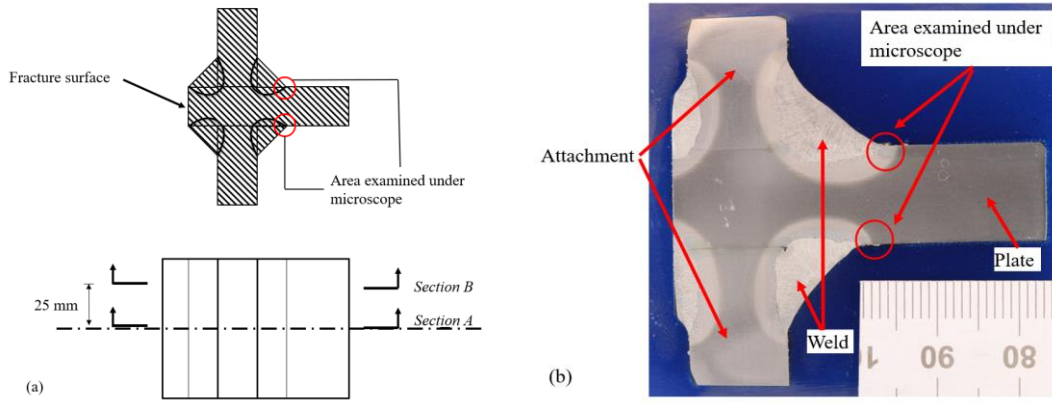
Macro-sectioning of run-out welds: (a) sectioning positions; (b) example of a macro-sections of the welds of specimen B12.5_1.
